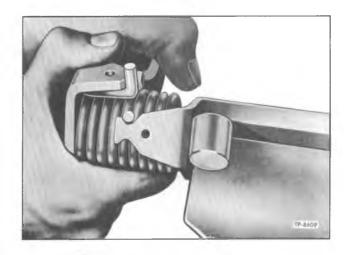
Assembling Torsion Spring and Levers (Eaton)
